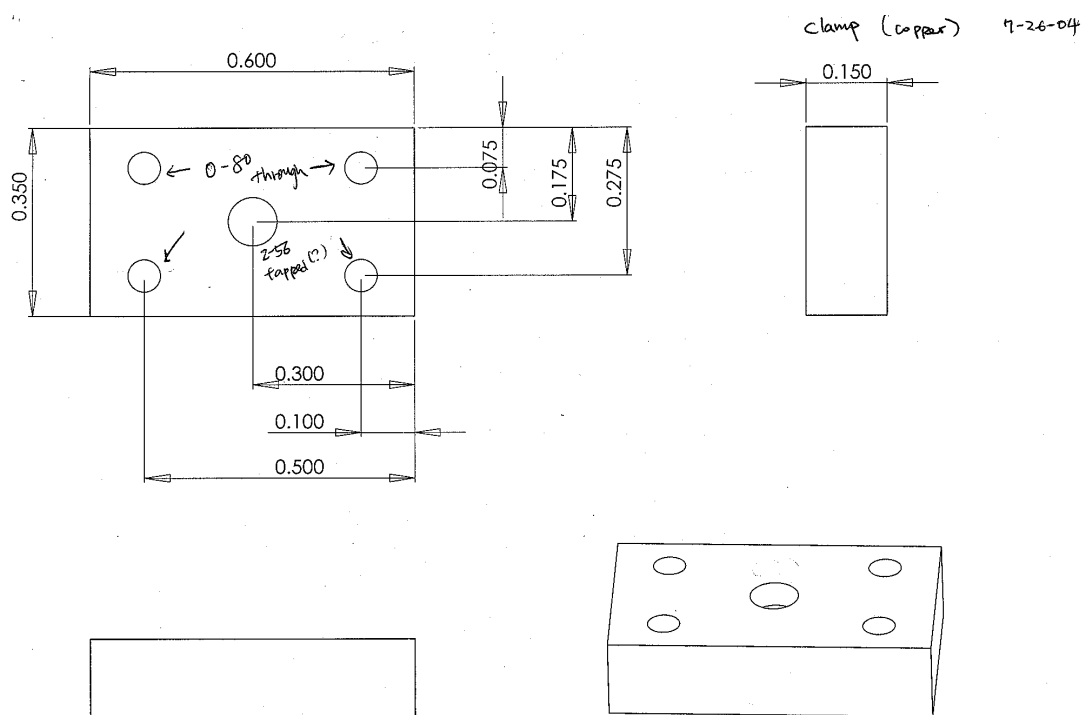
Detailed dimensions of the clamp. A current source is attached to the clamp through a metal lug that is screwed onto the center screw hole. The clamp itself is screwed onto the TA holder using nylon screws.
